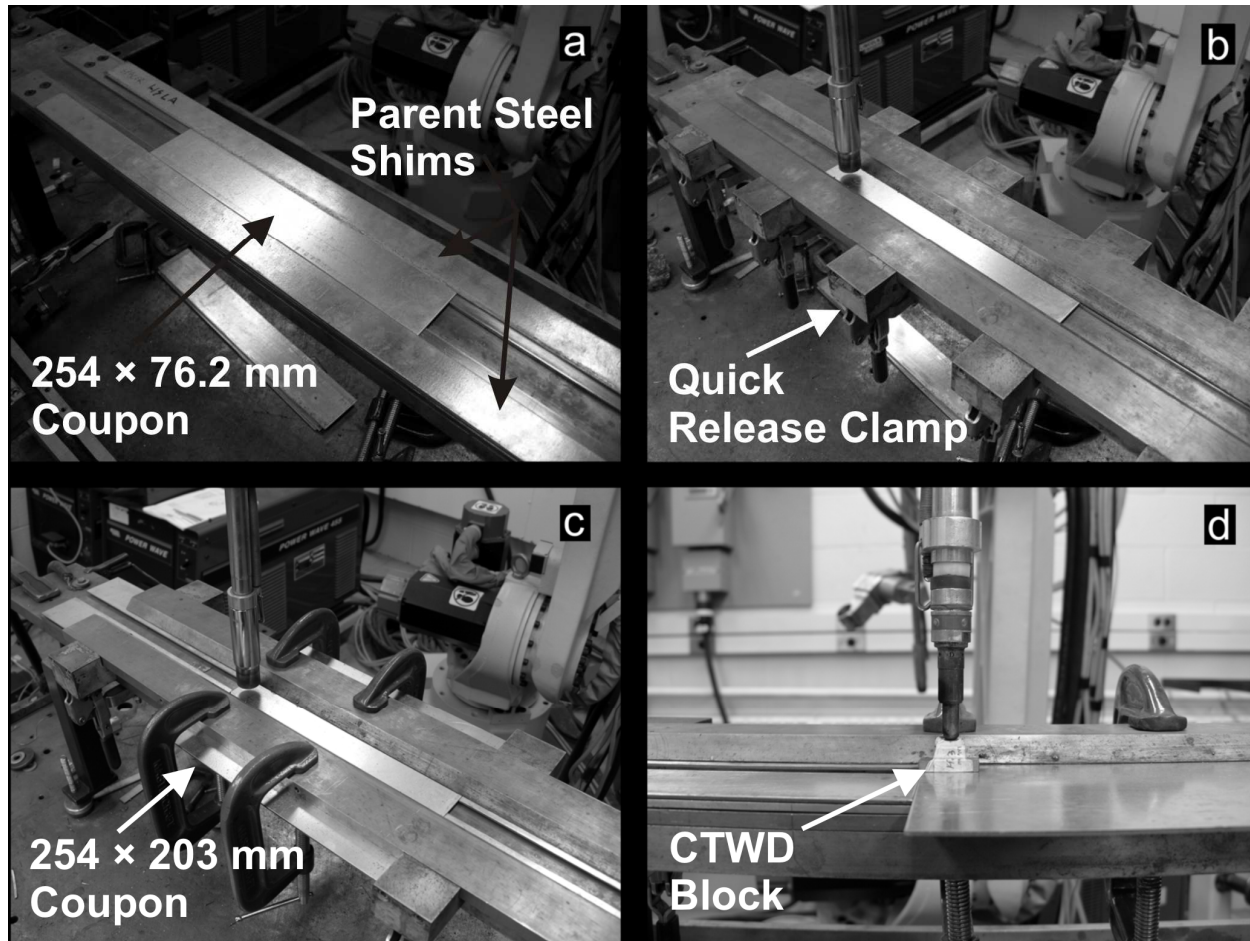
The welding worktable setup used during the study. a) The small weld coupon is shown prior to clamping, extra strips of parent sheet steel were required for the clamps in b) to rest upon, c) C-clamps have replaced two sets of quick-release clamps to allow clearance for the large tensile weld coupons, and d) the contact tip of the GMAW torch is being oriented against a pre-measured welding block.
